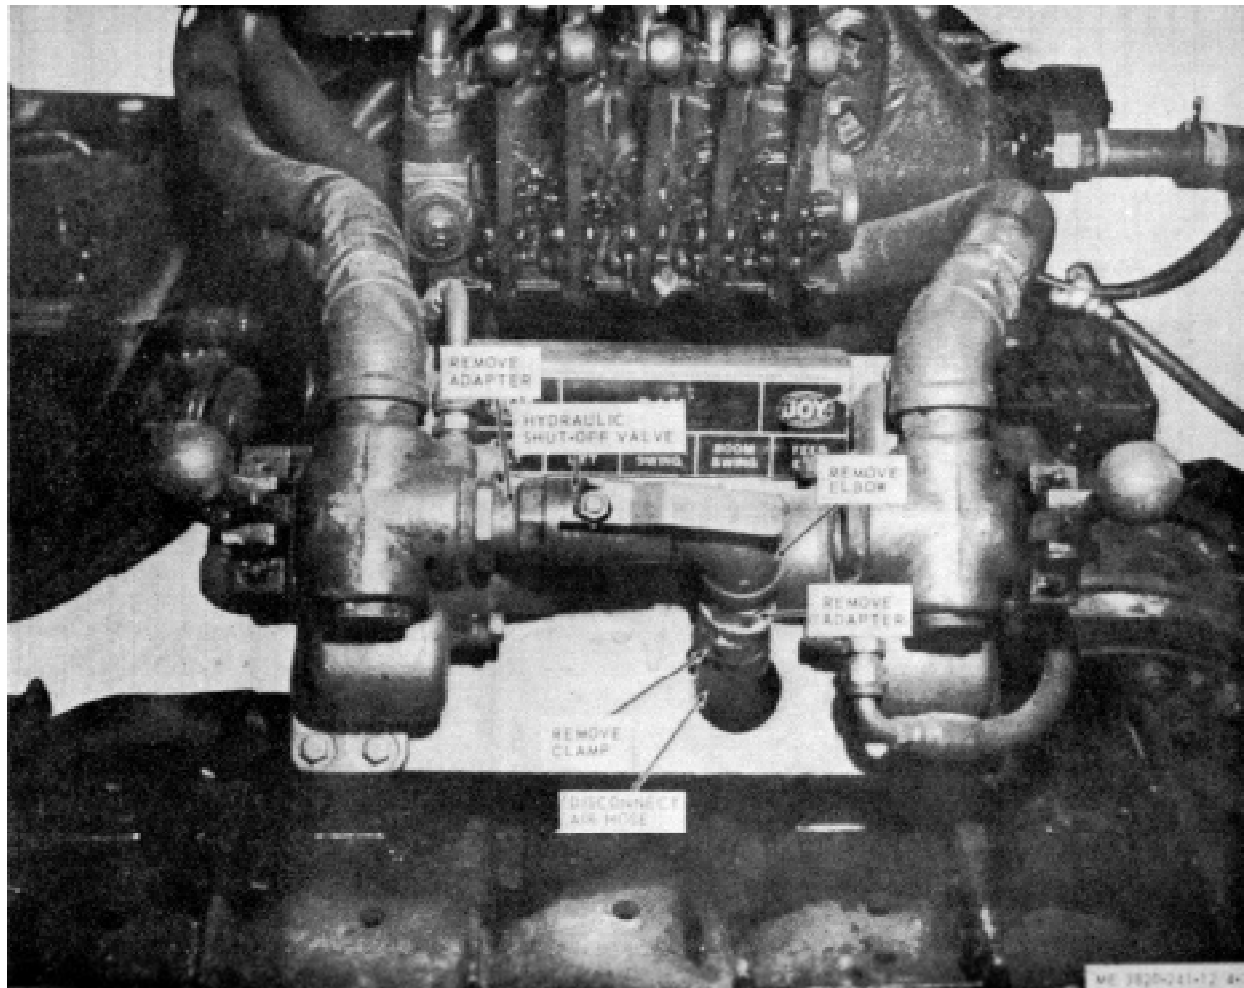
Hydraulic pump shut-off valve, removal and installation
